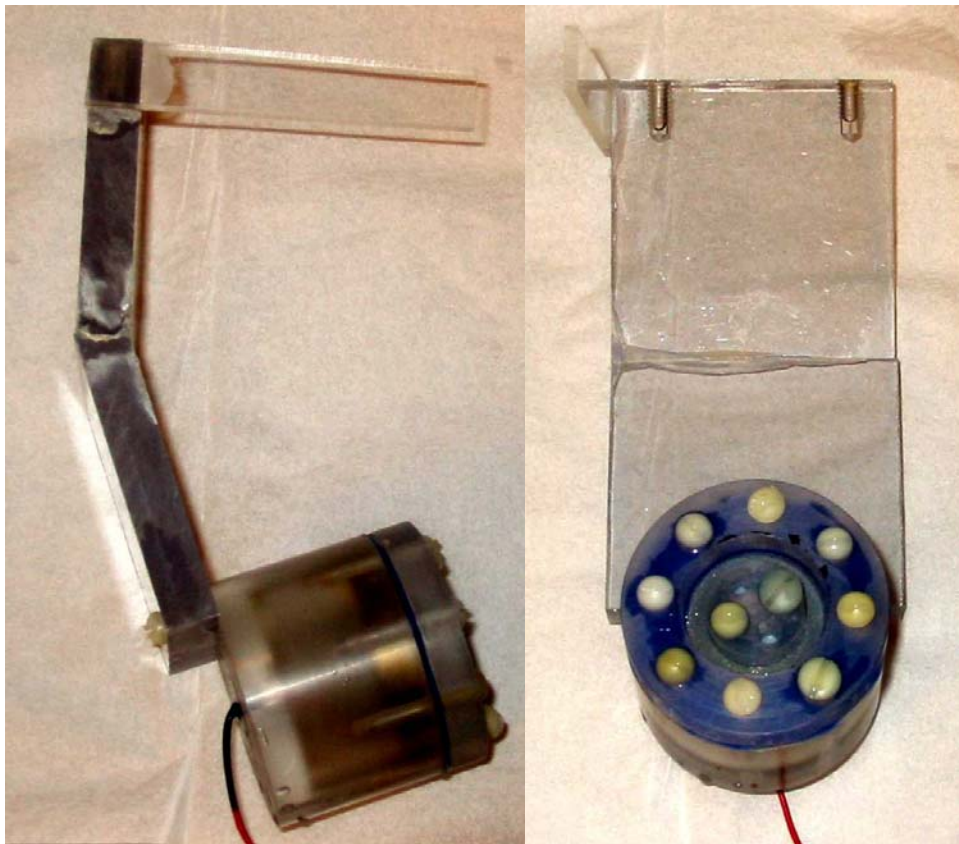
Actual Modified Plating Jig with Substrate Jig Mounted
